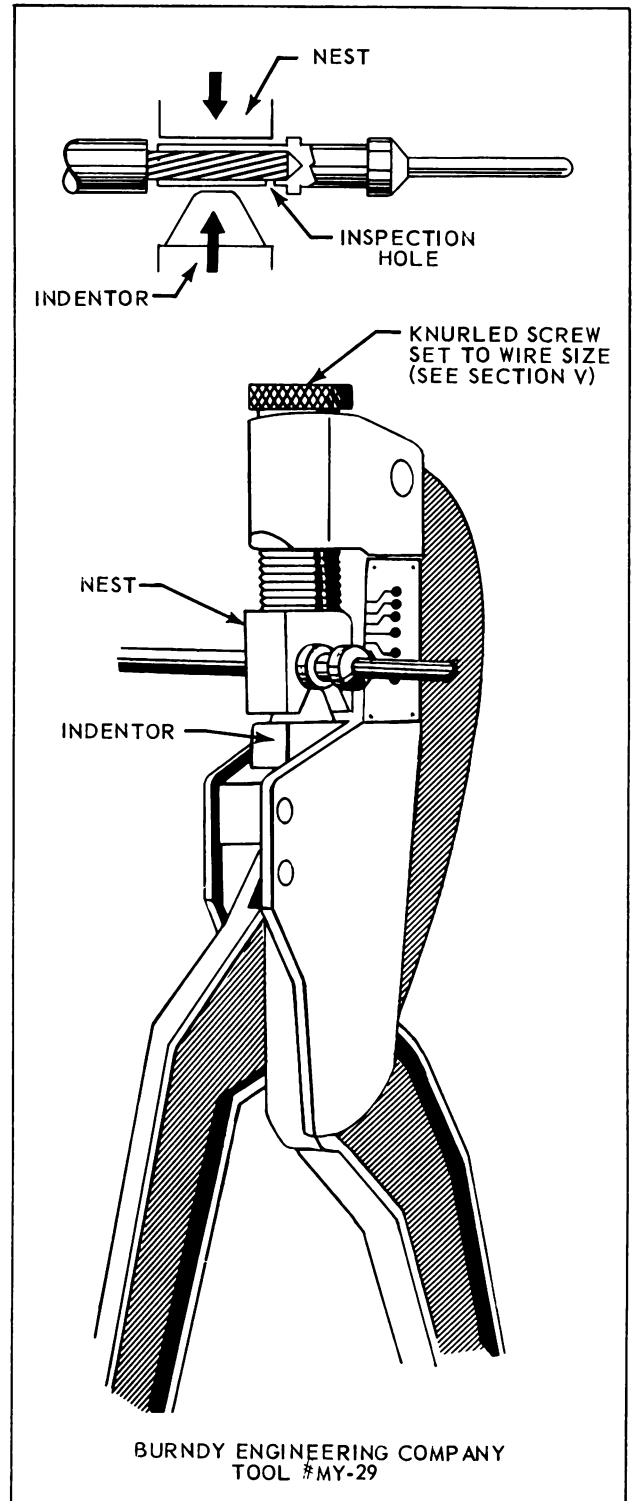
Crimping Contact with Burndy MY-29 Tool
